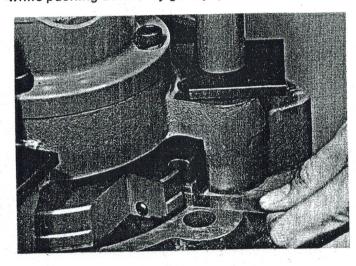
Use of Feeler Gauge to Set Depth of Cut
